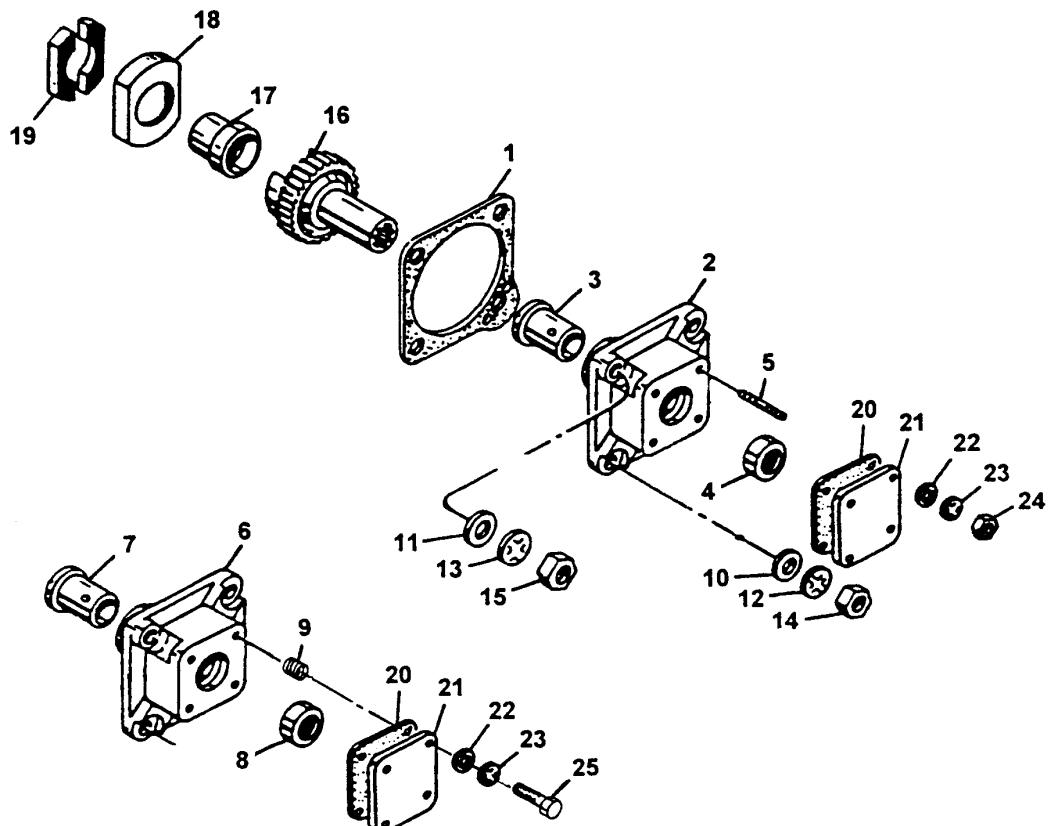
B. MAGNETO AND ACCESSORY DRIVE ASSEMBLY I0-550-G5B
